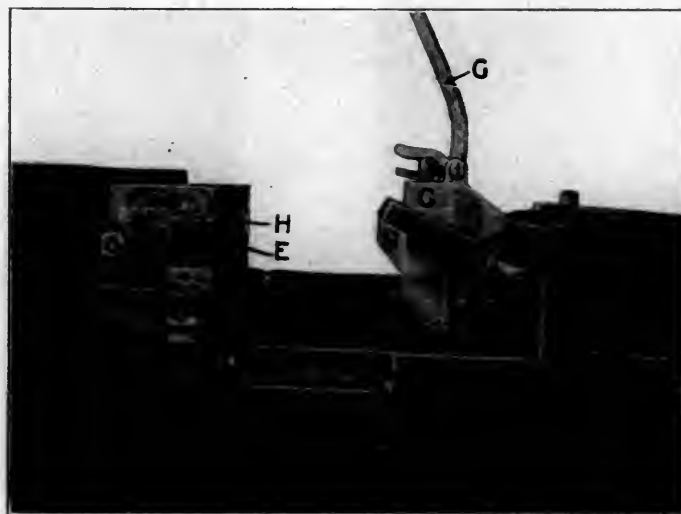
Dies in Place on the Bulldozer, Showing Stripper *D* Locked in Compressed Position
